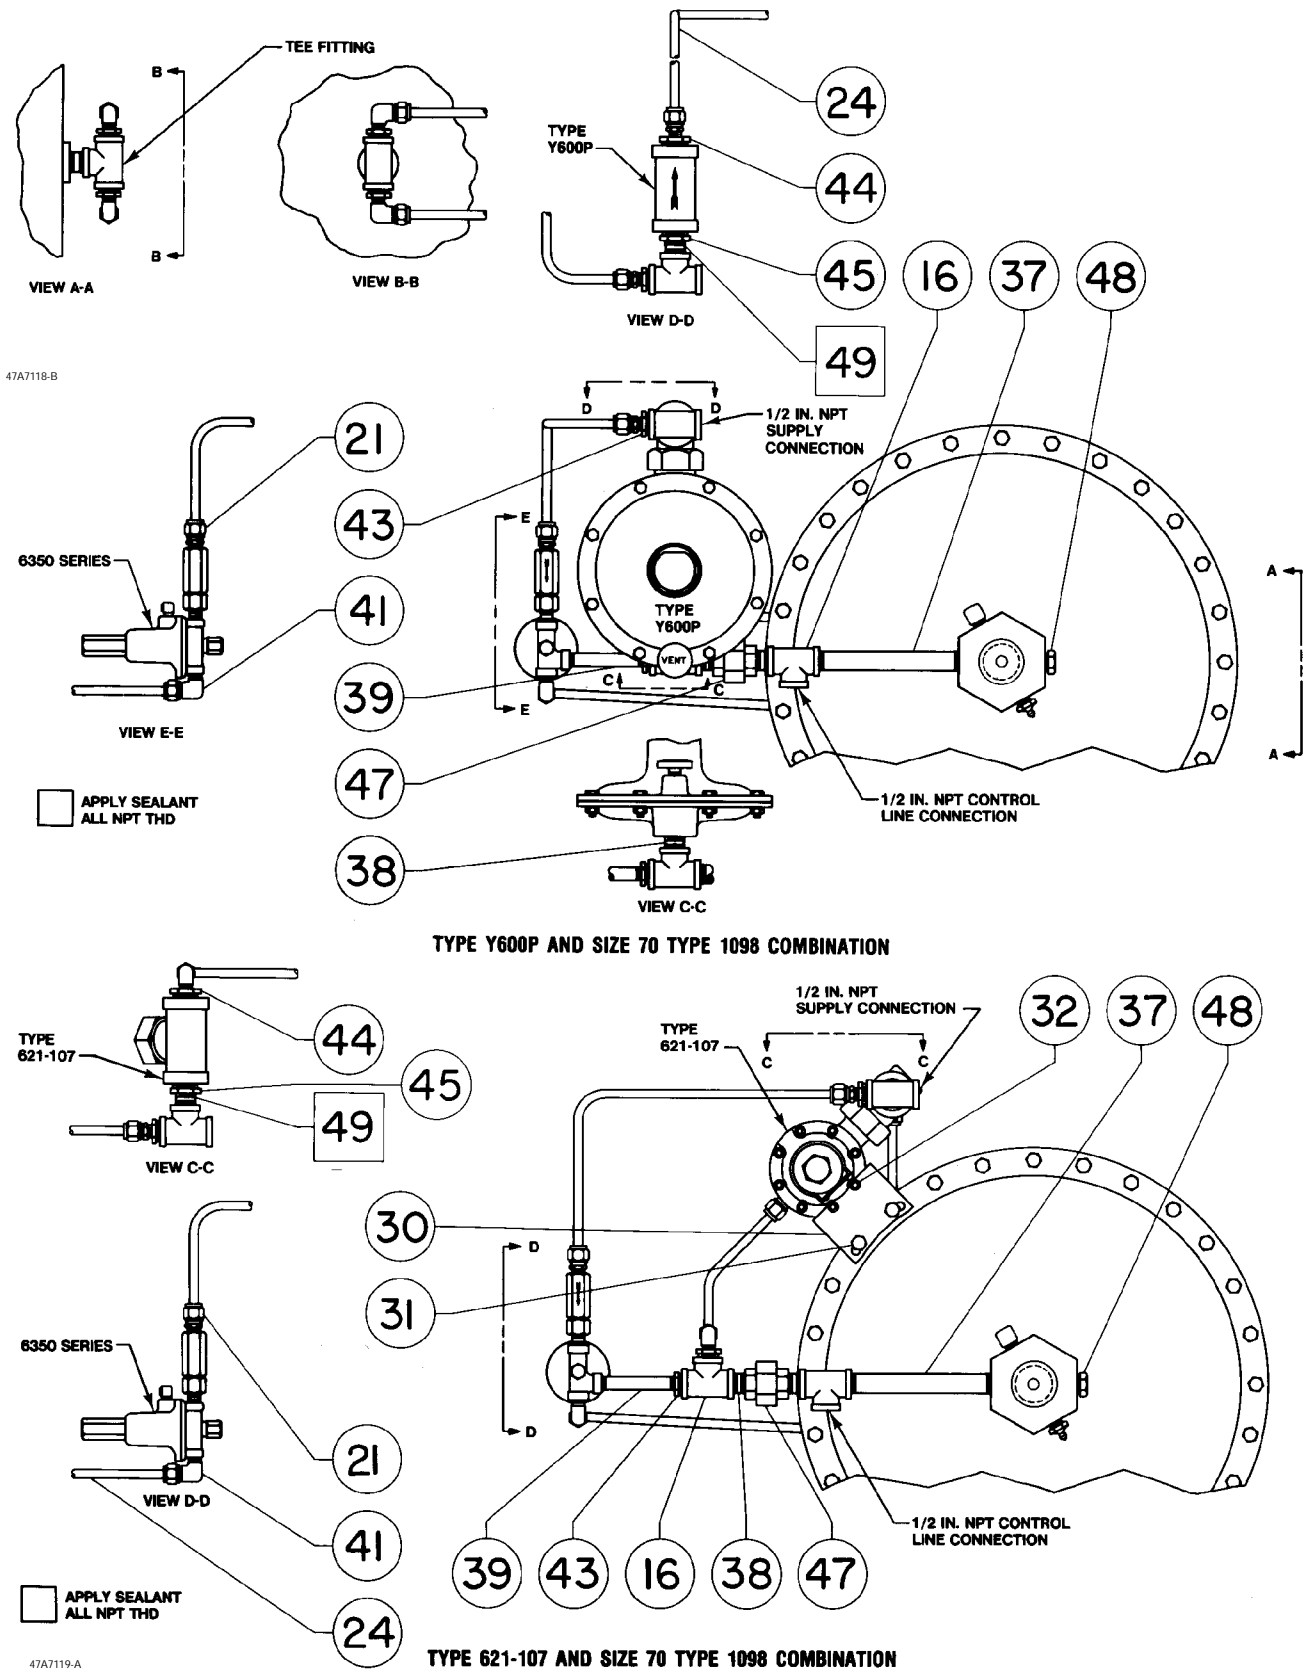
Dual-Pilot Mounting Parts for Boiler Fuel Installations
